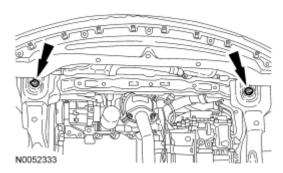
Locating Front Subframe Nuts Courtesy of FORD MOTOR CO.
